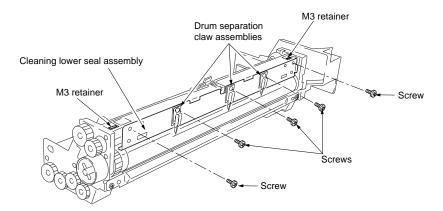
Detaching the drum separation claw assemblies and the cleaning lower seal assembly
